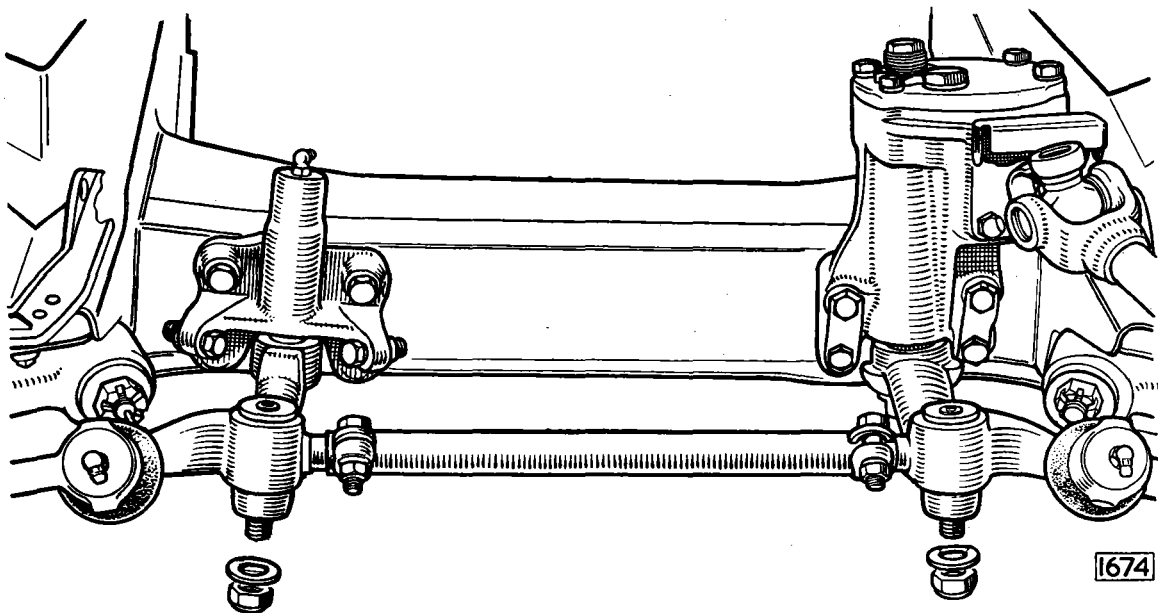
When refitting the track rod the drop arm and idler lever must be in the "straight ahead" position.
